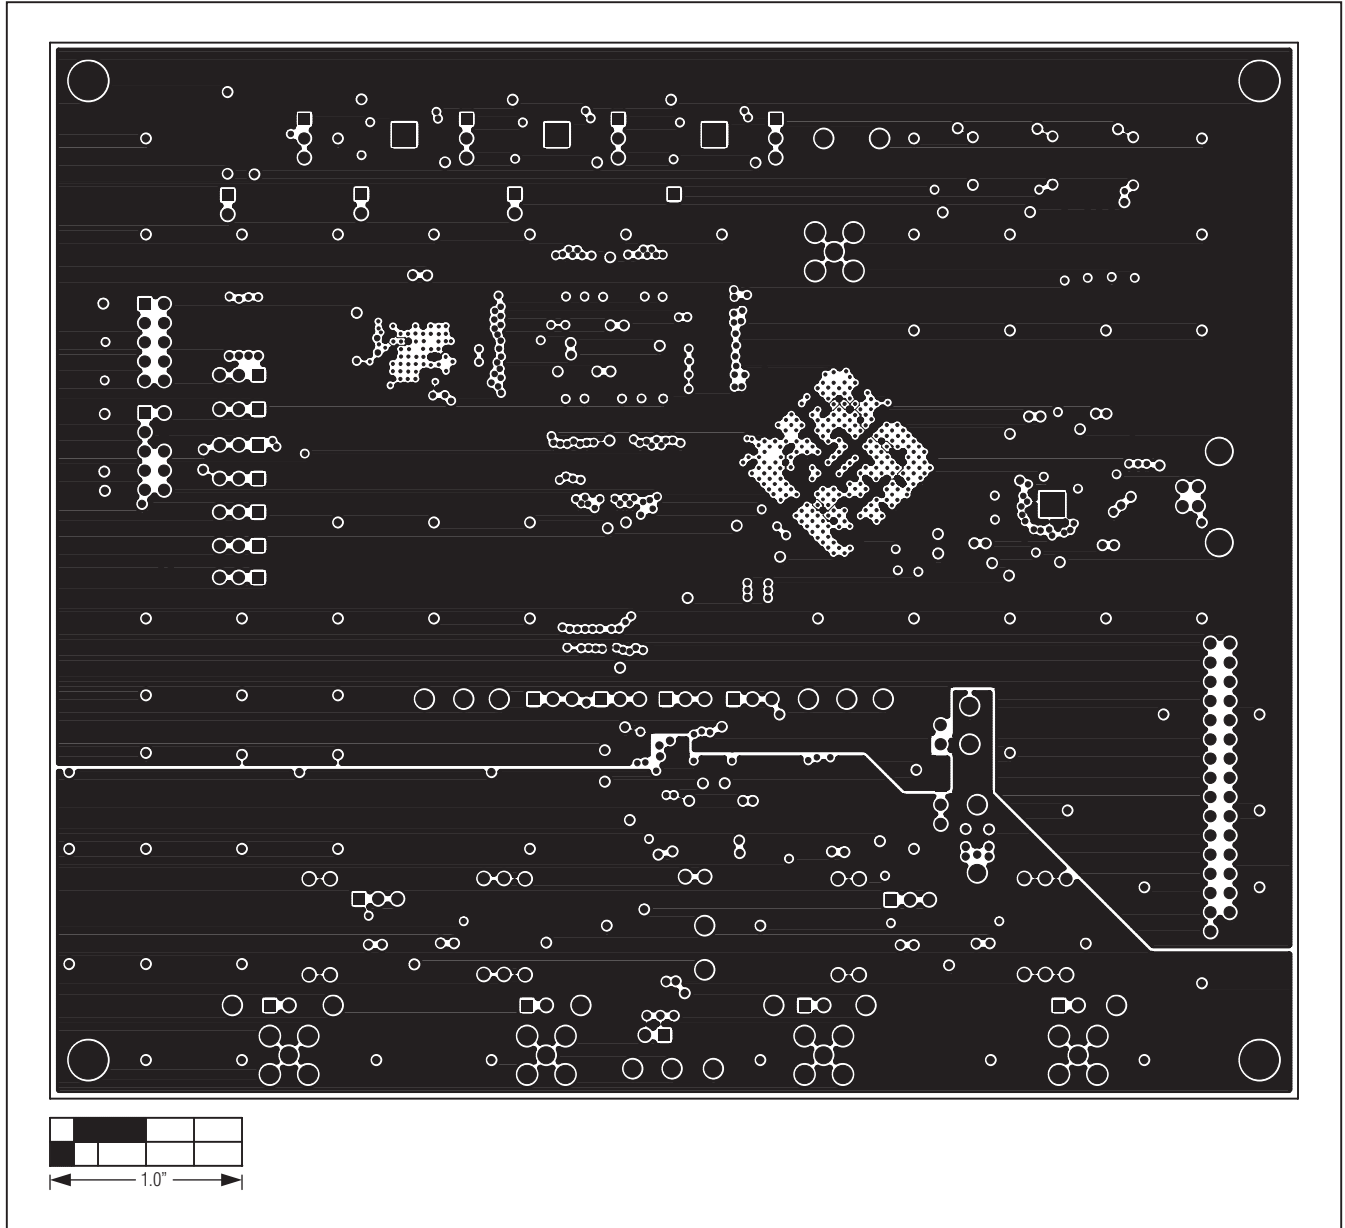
MAX11666 EV Kit PCB Layout—Layer 11
